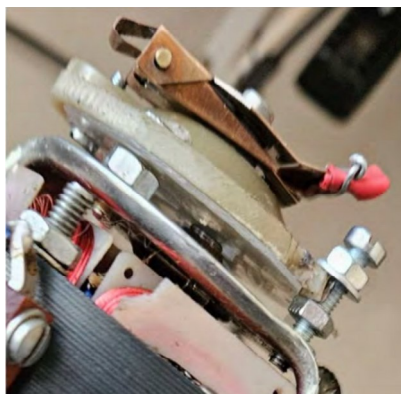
Mounting support. A 4mm machine screw 20mm long. Three 4mm nuts.
